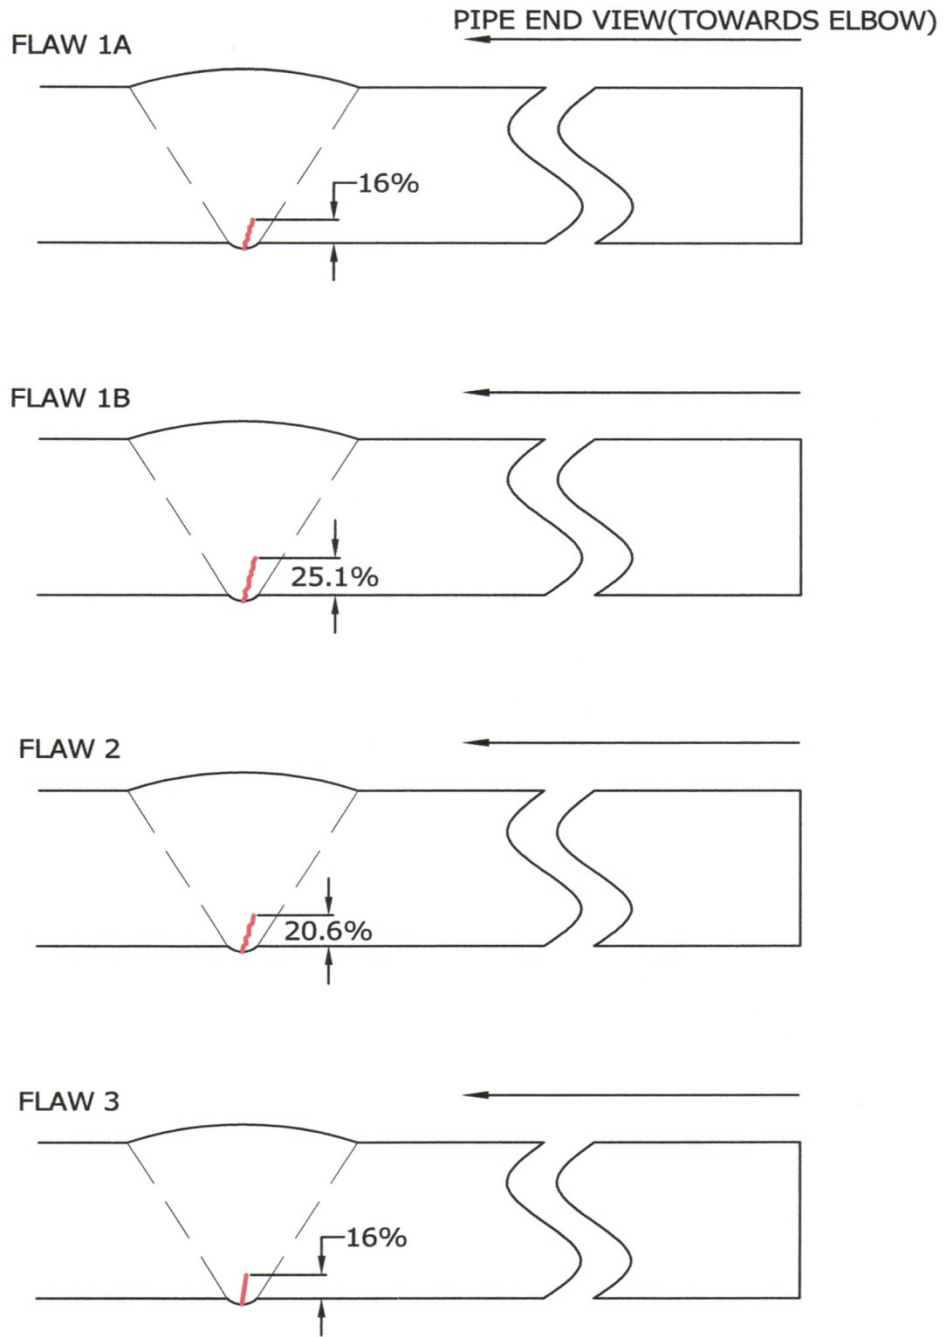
Side View Illustration of All Four Thermal Fatigue Cracks Implanted into PZR CASS Specimen 9C-002 (courtesy of FlawTech, Inc.)
